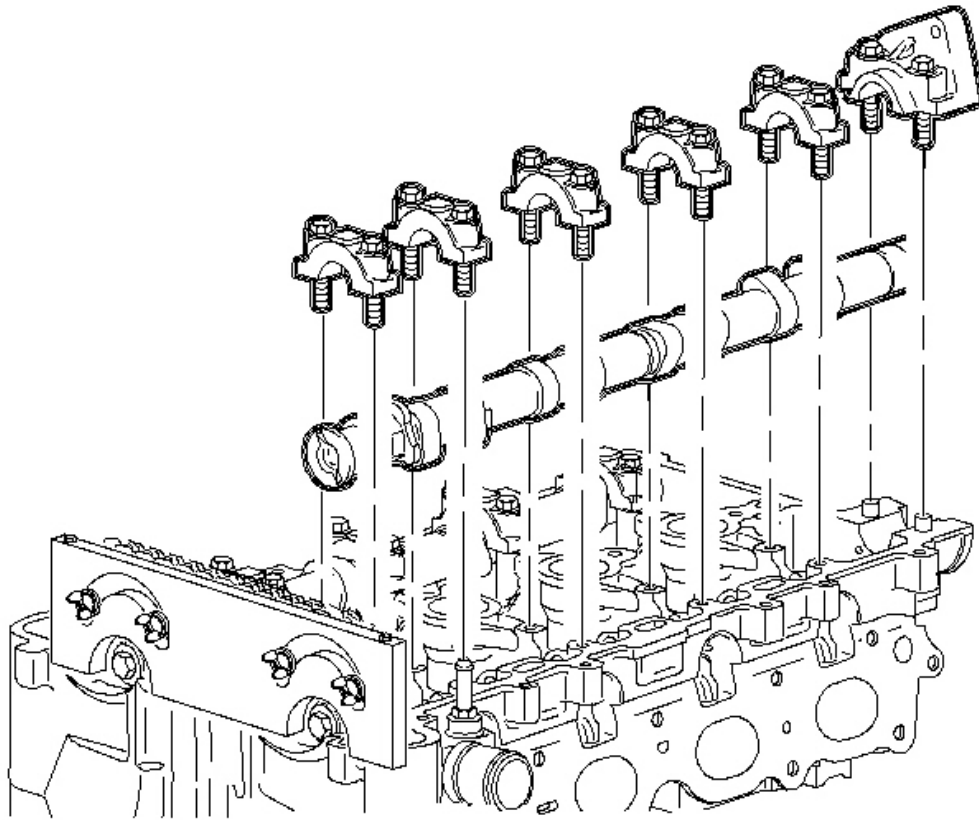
Pulling Camshafts Straight Up To Avoid Damaging The Cylinder Head Thrust Surfaces
